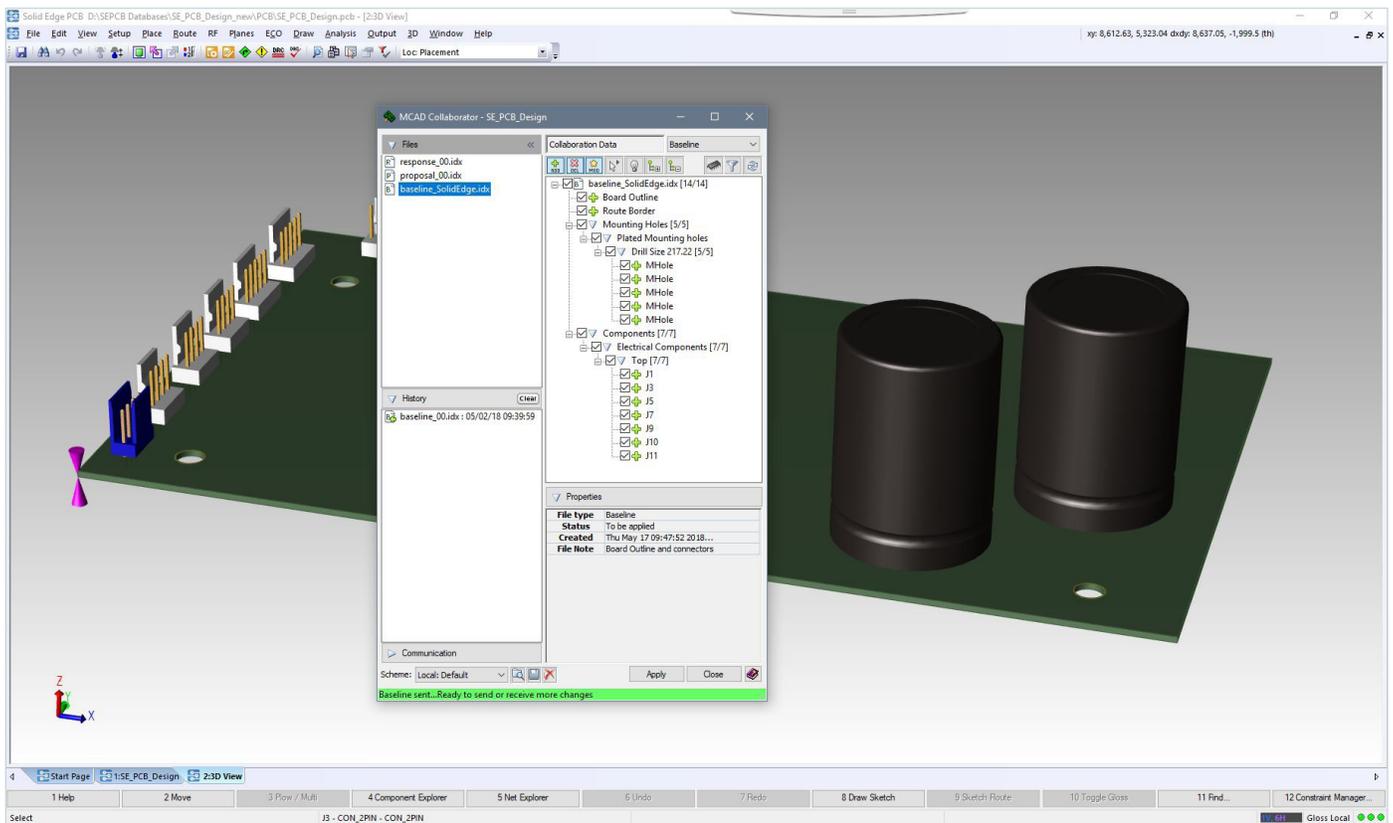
Solid Edge PCB Design provides an integrated ECAD-MCAD collaboration environment that allows electrical and mechanical engineers to be fully synchronized.
